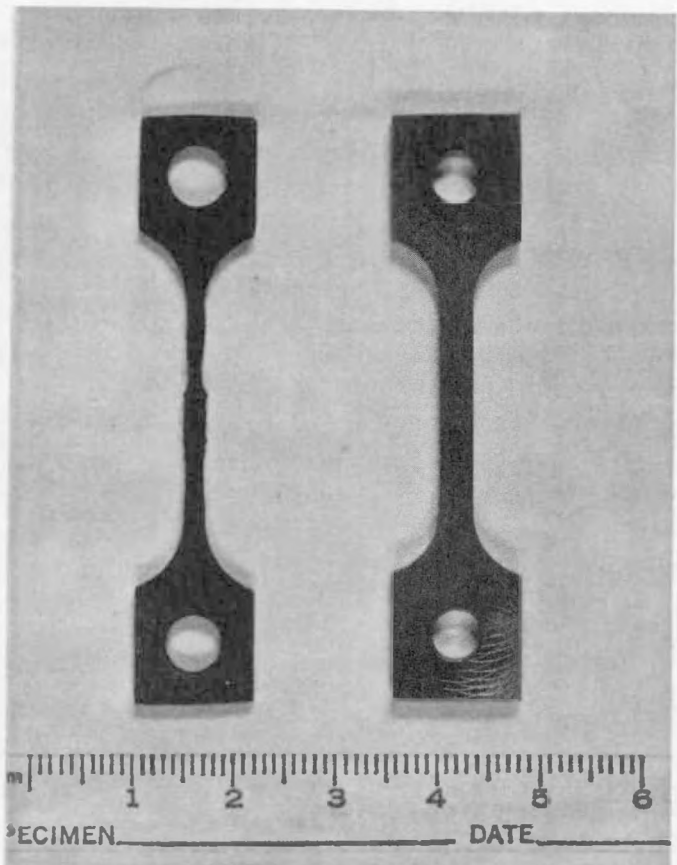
Weld Sample Before and After Exposure to 10% NaOH, 316°C (600°F)
